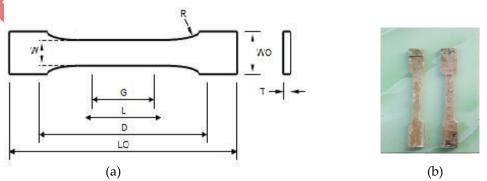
(a) Design specimen standard ASTM D 638M-93 and (b) result of specimen fabrication.
